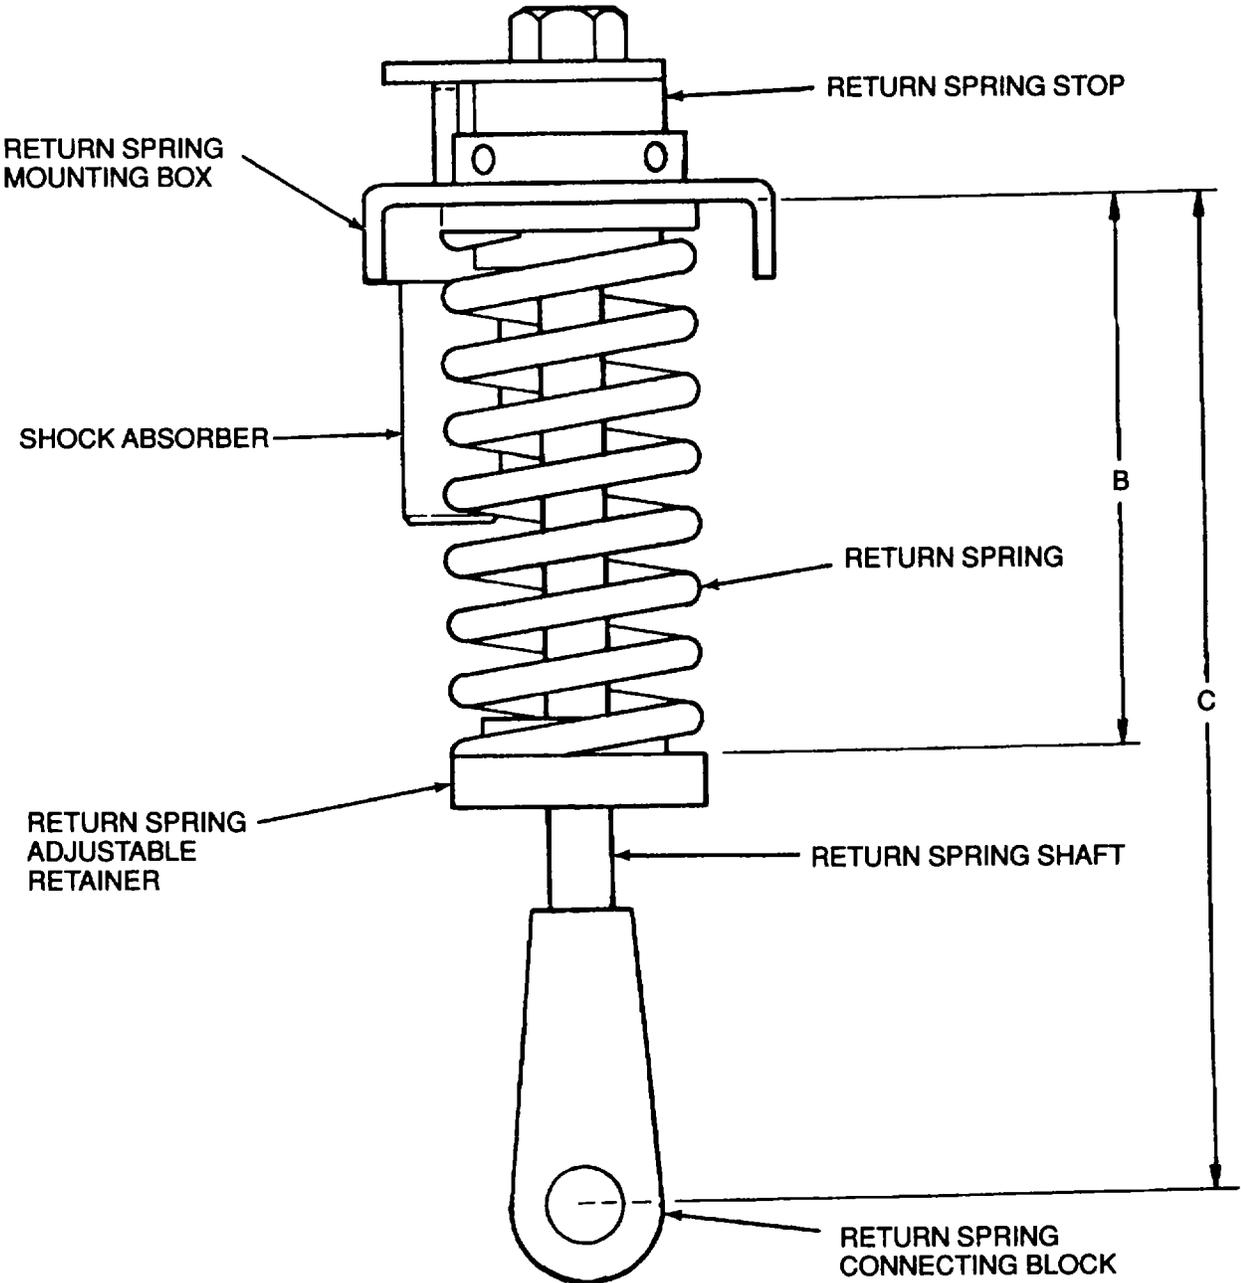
Load Circuit Breaker CB101, Return Spring Preload Setting
